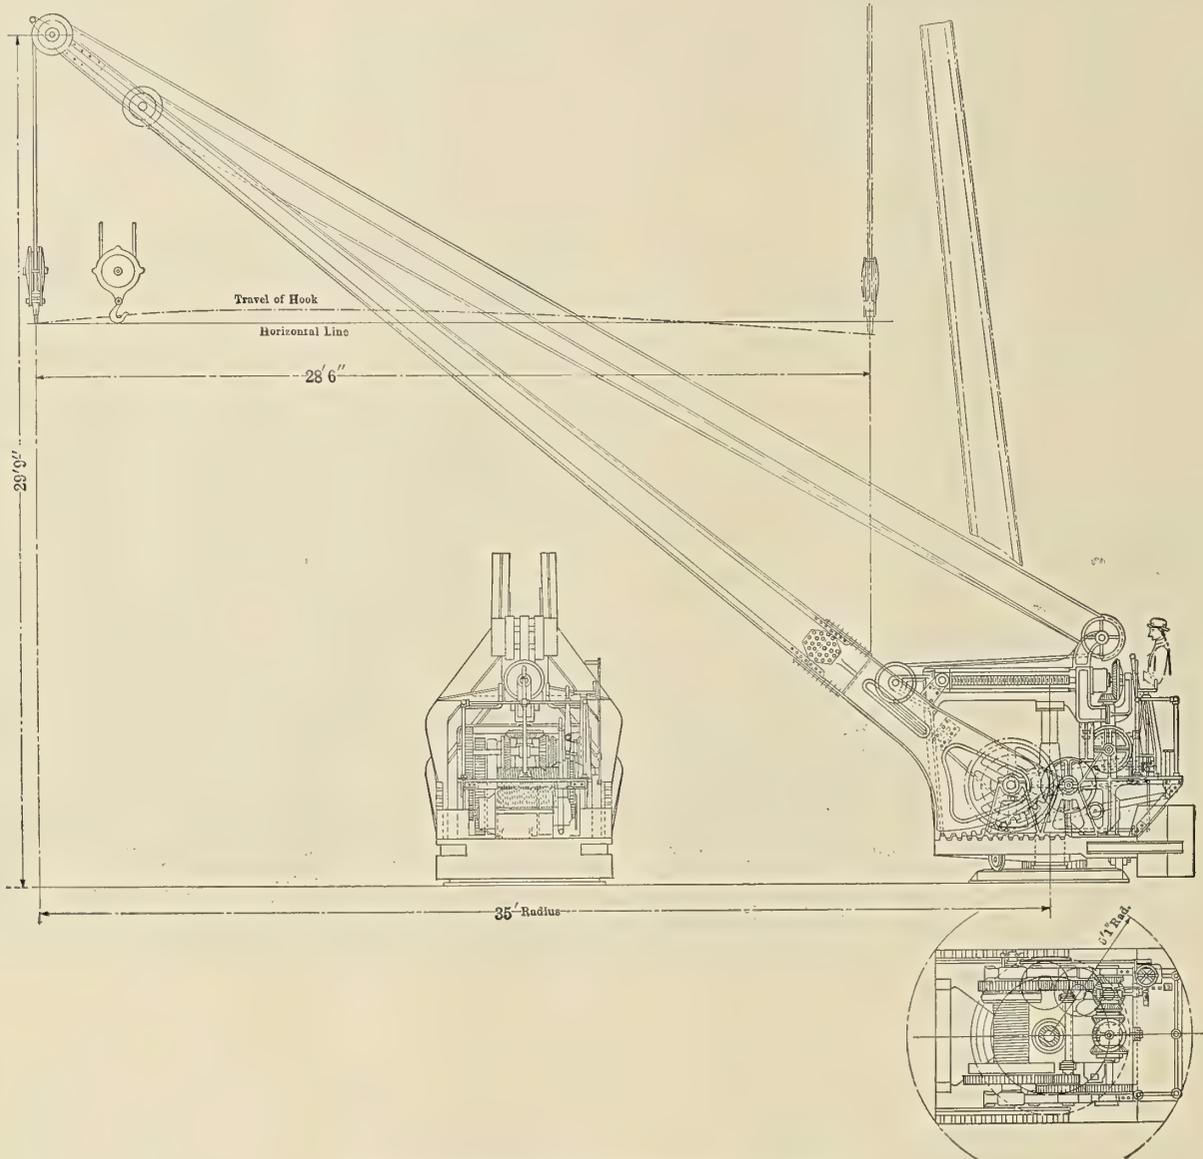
ONE MOTOR, 3-TON COMPENSATING QUADRANT CRANE
